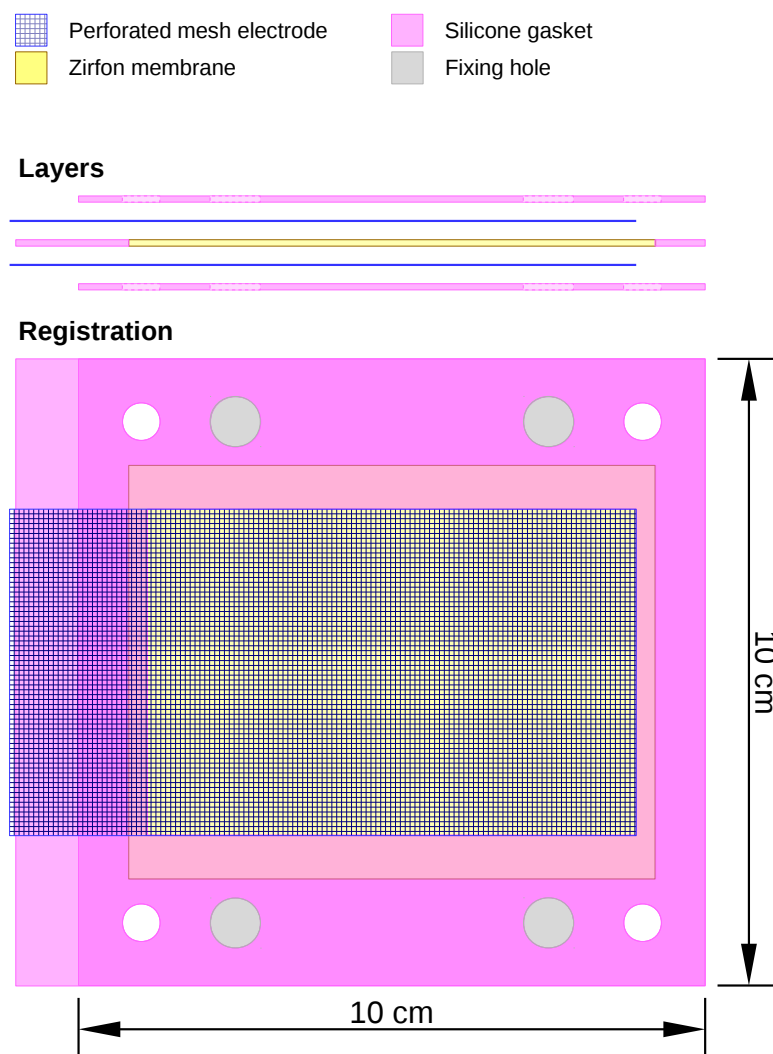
Assembly drawing of a zero-gap electrode pair, which is composed of five layers as shown. The layer thicknesses are drawn close to correct scale.
